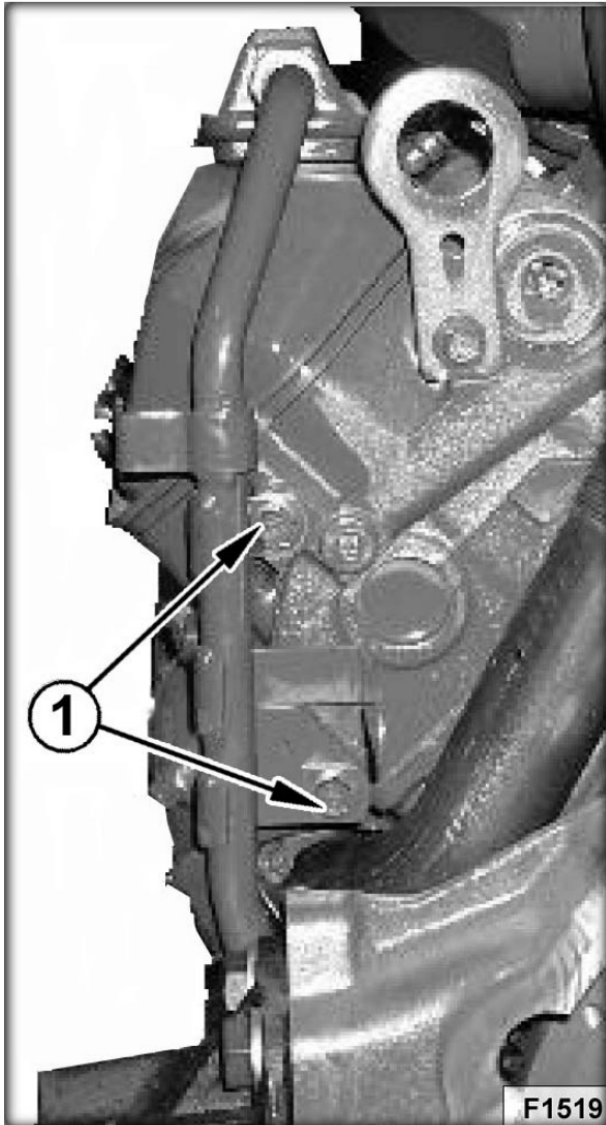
Installing Charge Air Cooling Tube/Crossover Pipe Assembly
